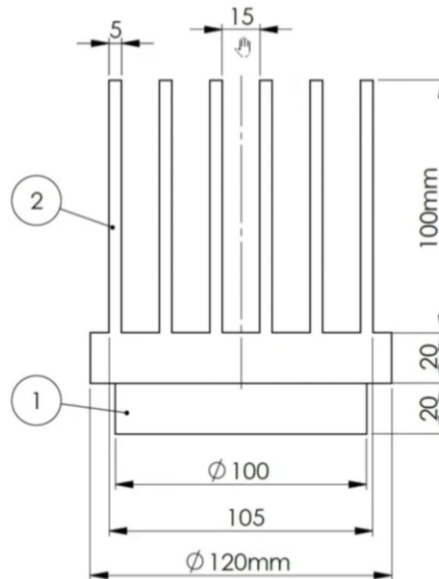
Heat Sink Engineering Drawing (Dimensions)
